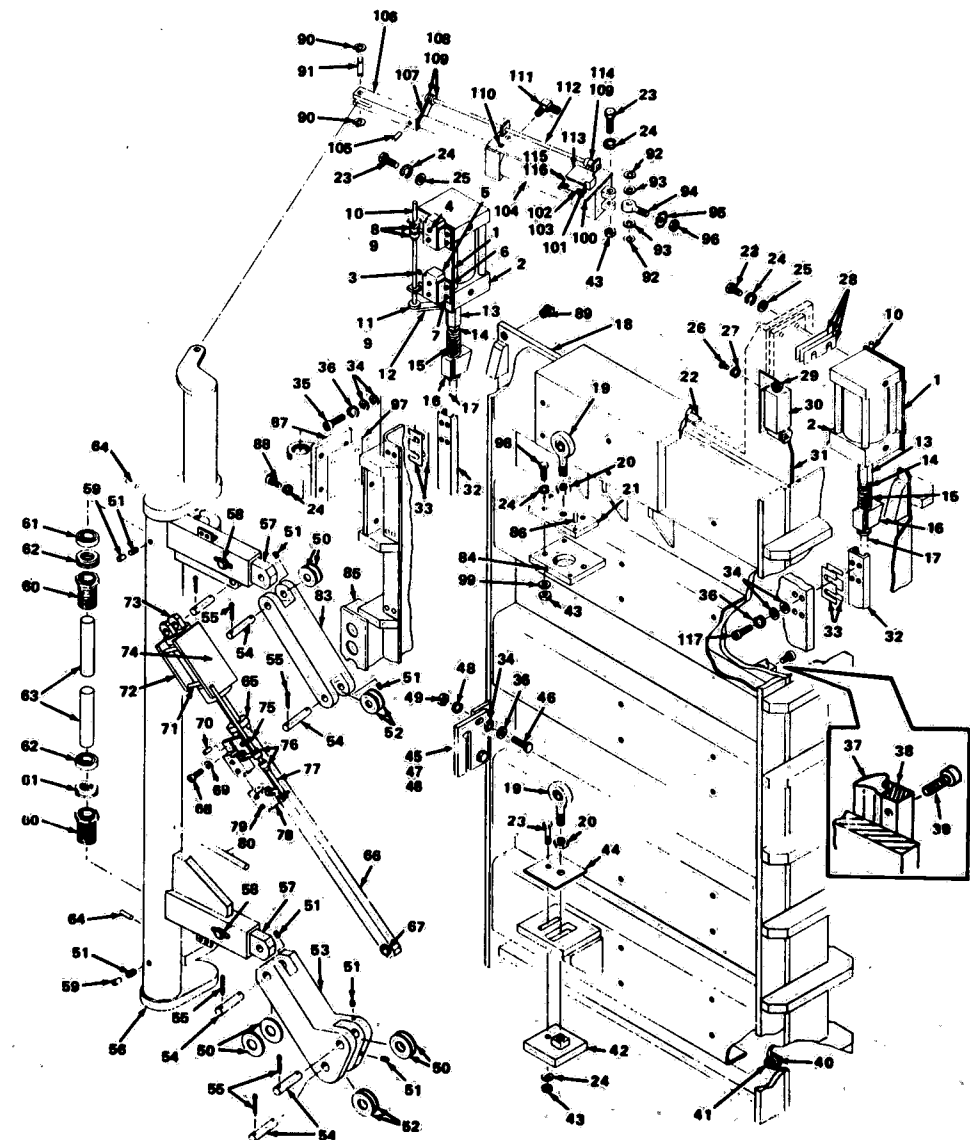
POWER WEDGE DOOR ASSEMBLY
